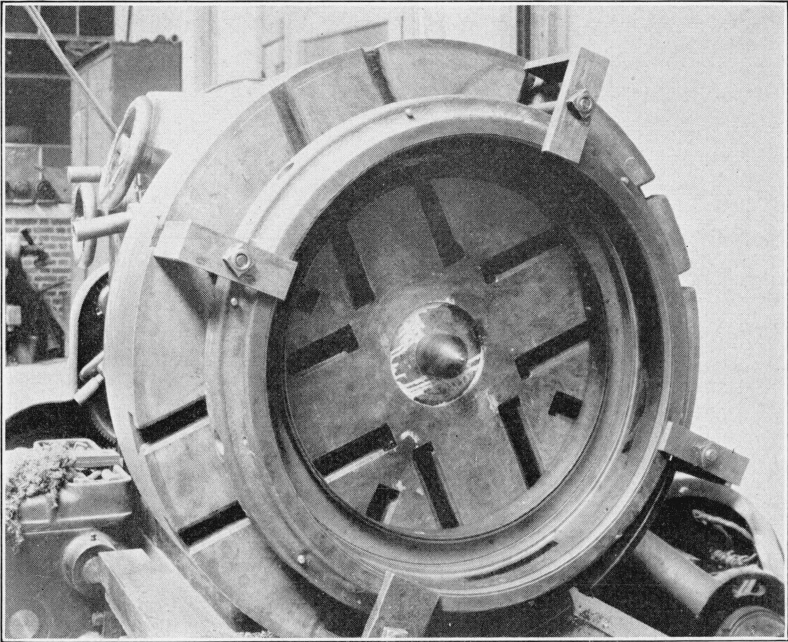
Housing for ball-bearing joint (in process of machining)
